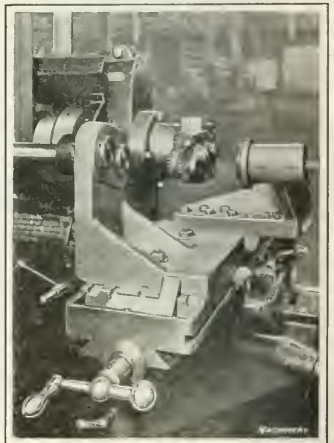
Fixture shown Empty, with Locating Plugs exposed
